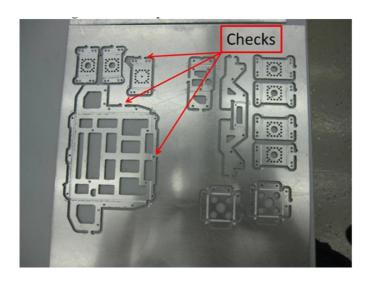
Sample parts with checks used to constrain the parts of the aluminium sheet
